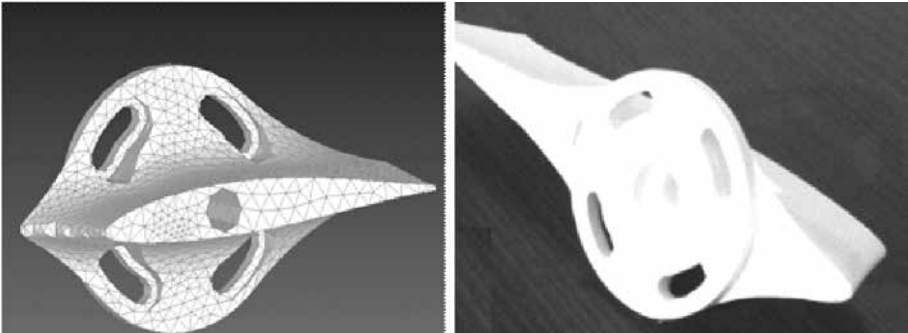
3D printed wing joint: FEMAP model (left) and manufactured (right)
